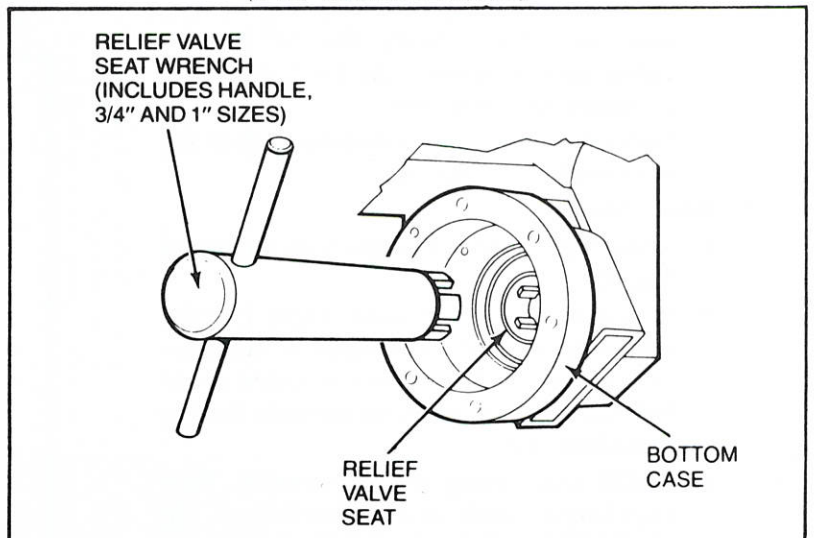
B. RELIEF VALVE SEAT REPLACEMENT FRP-II
